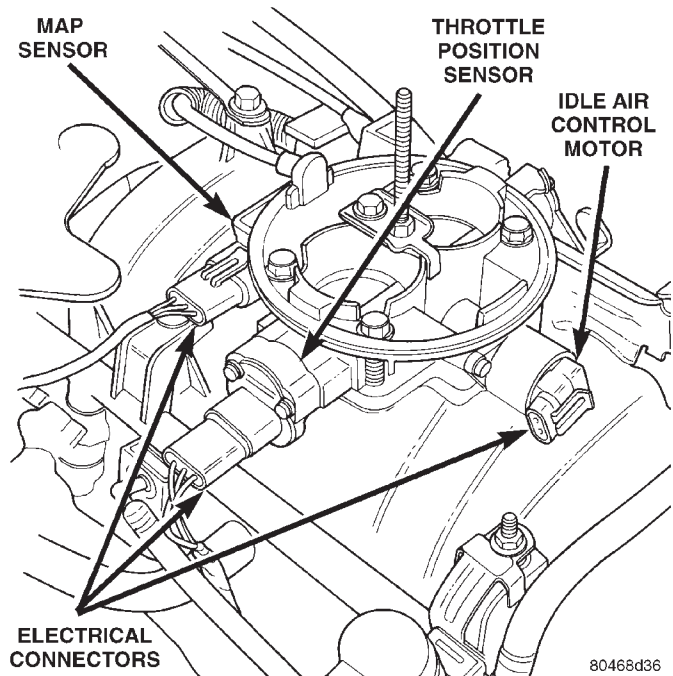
MAP and Throttle Position Sensor Location—5.2L Engine
